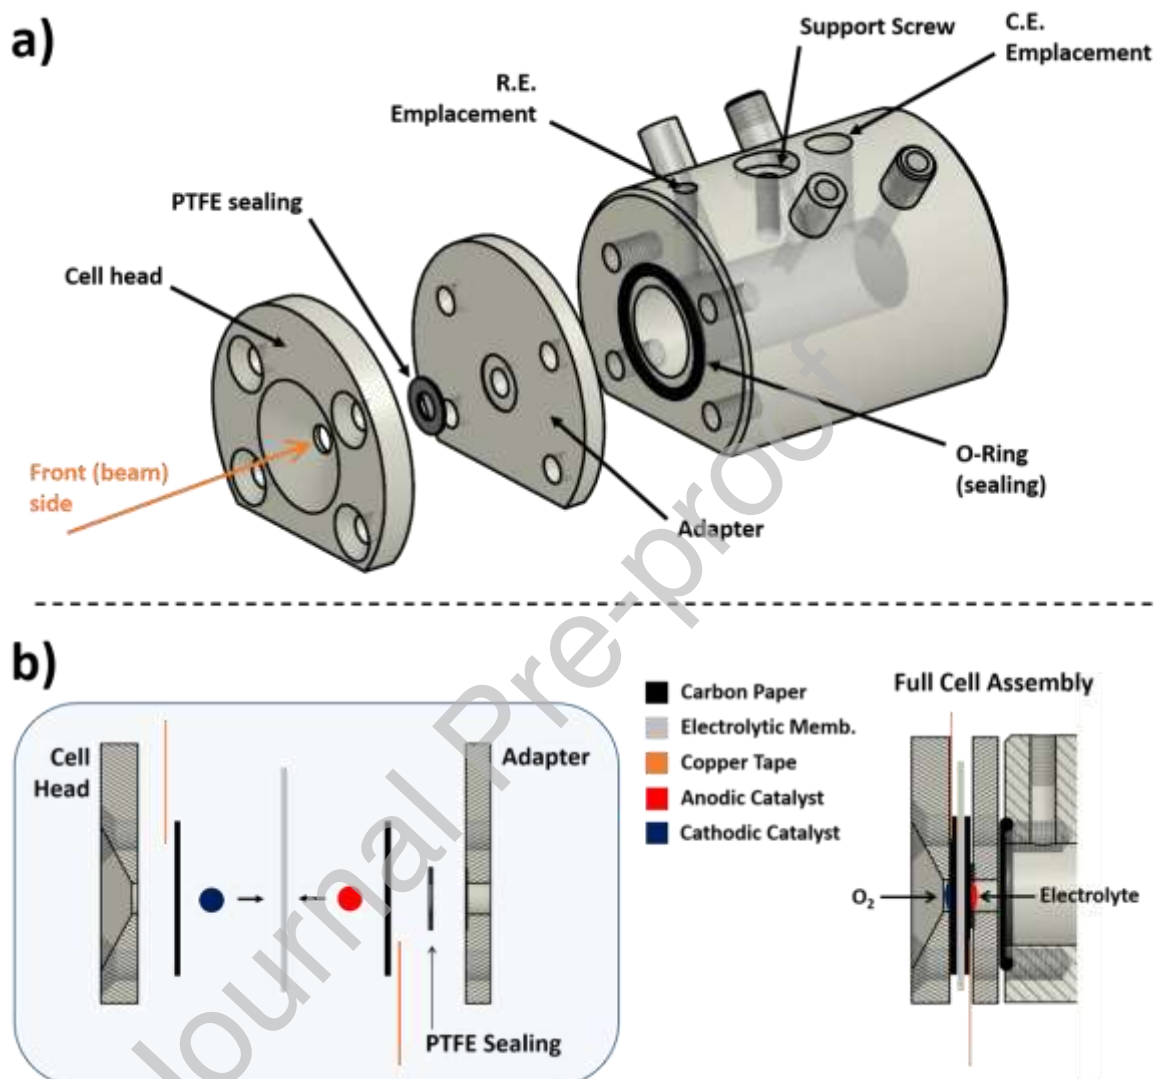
a) Exploded view of the electrochemical cell. b) Exploded view of the fuel cell stack on the head assembly.
